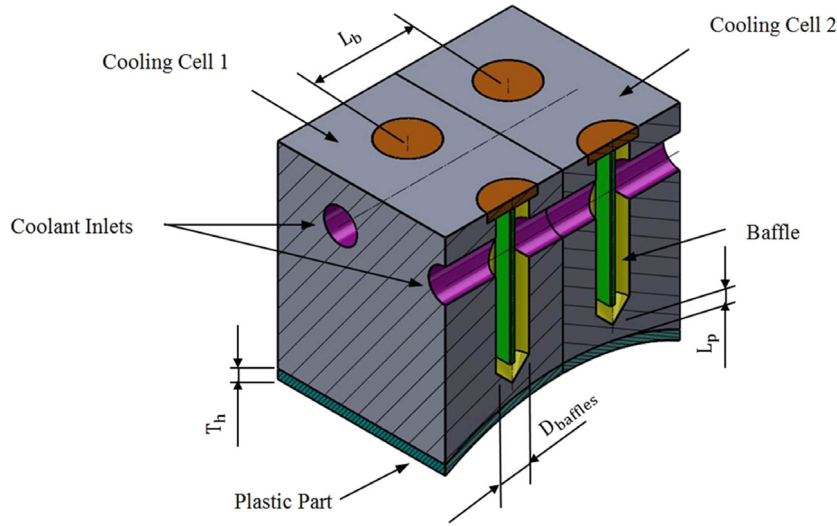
Cooling cell considered for the dimensioning of the complete mold.
